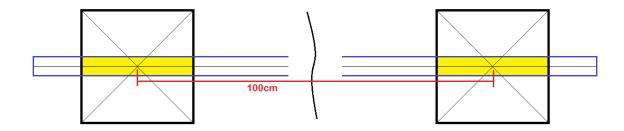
An example template used to align and epoxy the motor mount bottoms to the carbon fiber rods. The centers of the mounts should be 100 cm apart.
